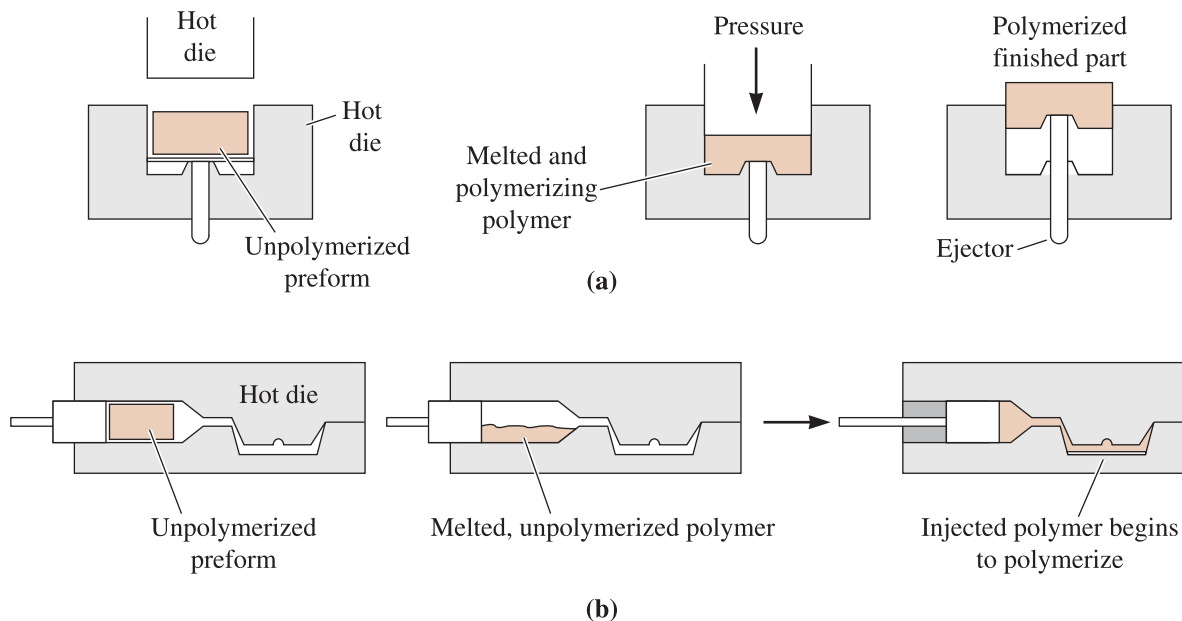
Typical forming processes for thermosetting polymers: (a) compression molding and (b) transfer molding.
